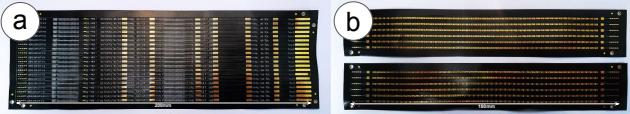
Flex PCB panels assembled by a factory: (a) the main FiberCircuits with MCU and sensors, (b) the LED fibers.
